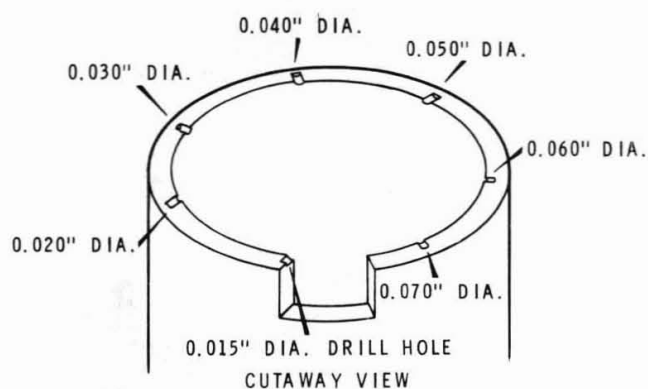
SNAP-21 ultrasonic test standard flat bottom drill holes
